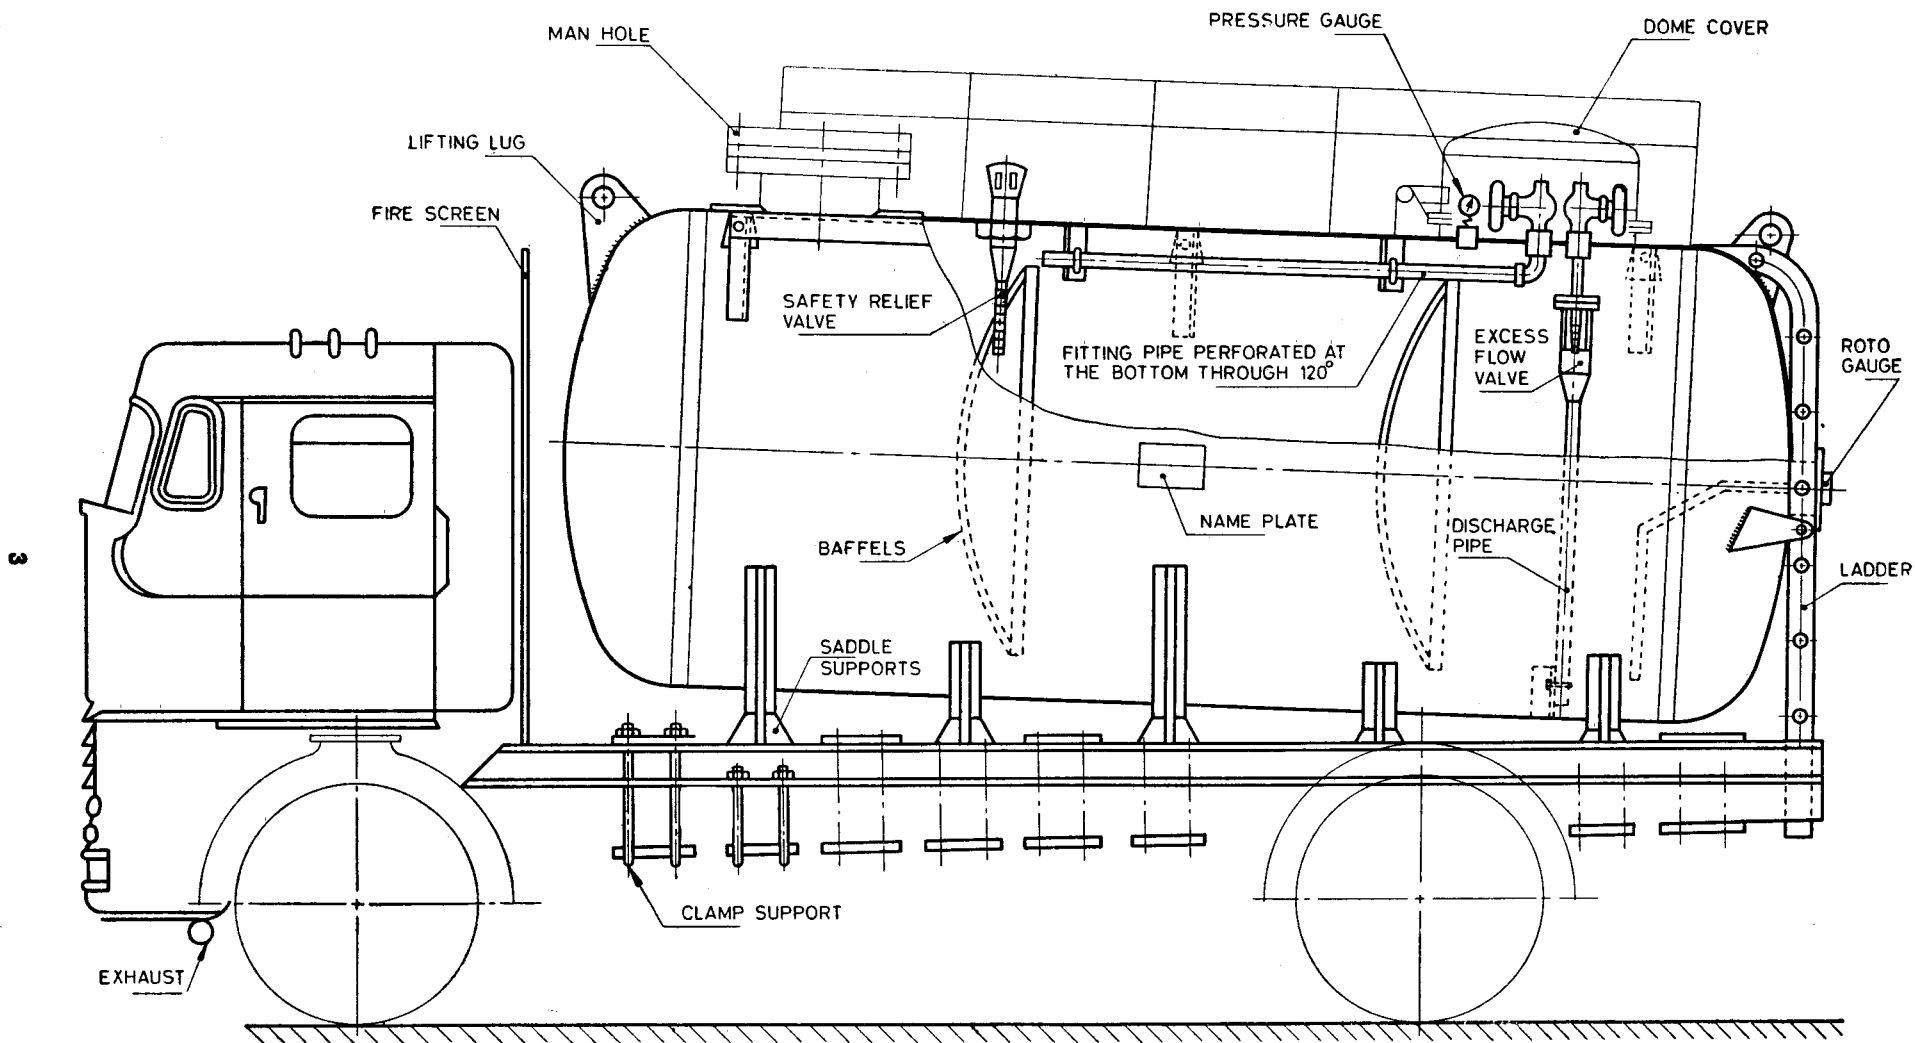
SCHEMATIC DETAILS OF LPG TANKER
